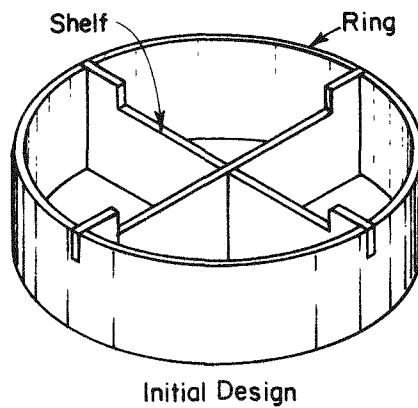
Tray Support Rings for PuFF Sintering Furnaces Rack
